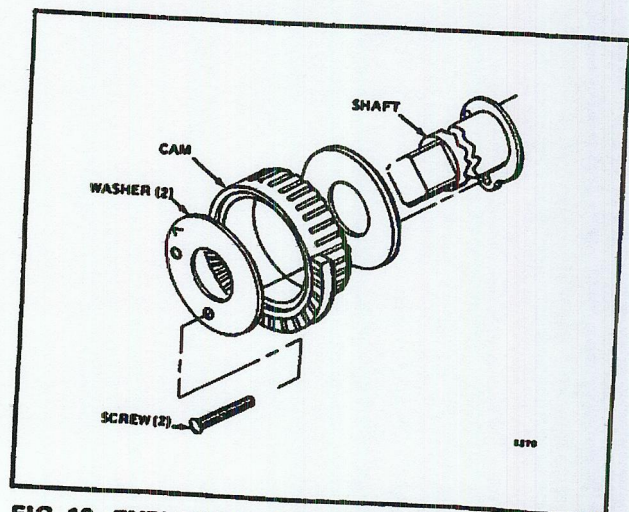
EXPLODED VIEW OF THE CAM ASSEMBLY.
